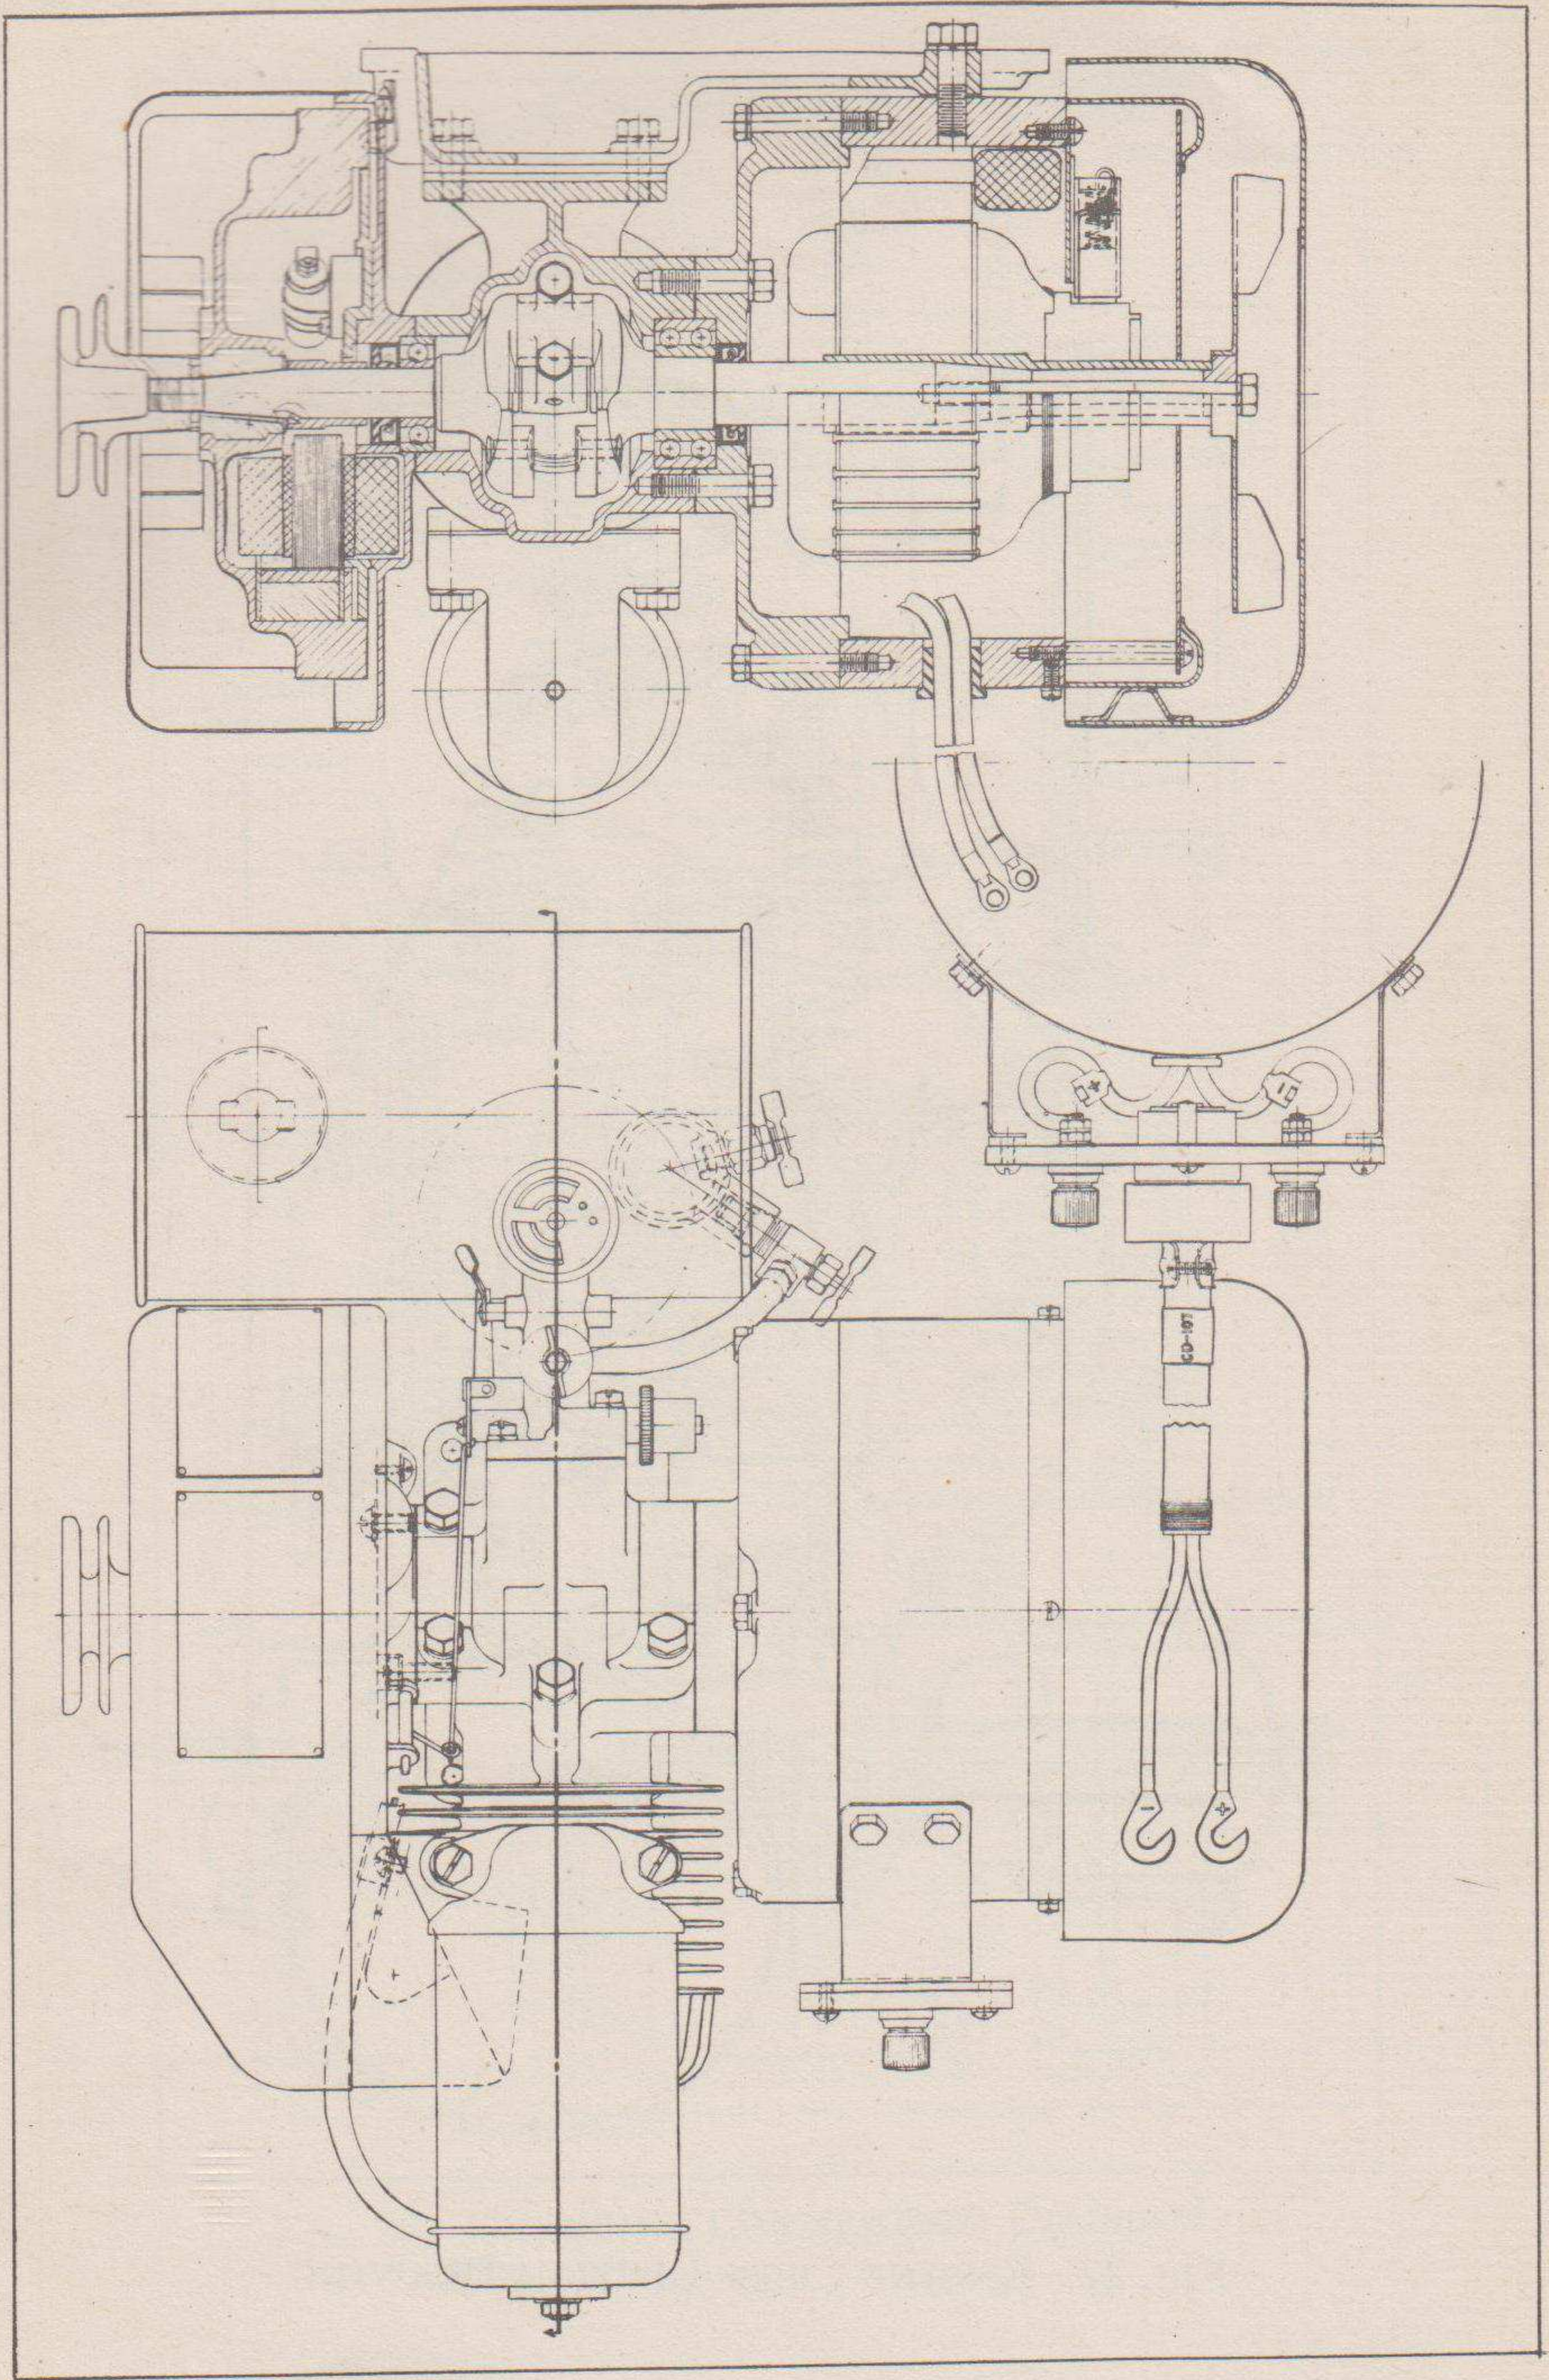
POWER UNIT CROSS SECTION DRAWING
